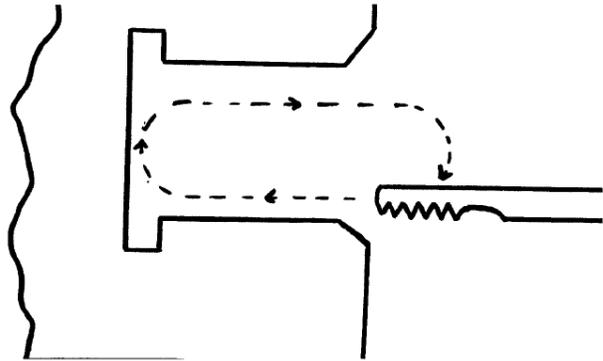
Holder recommends this motion with the inside chaser to cut the threads. The chaser should just cut clean into the recess and must be lifted clear before the chaser end hits the bottom of the hole. This is why it is more difficult to chase threads with fewer teeth per inch. The chaser is moving so much faster it is difficult to lift clear before touching the bottom.
